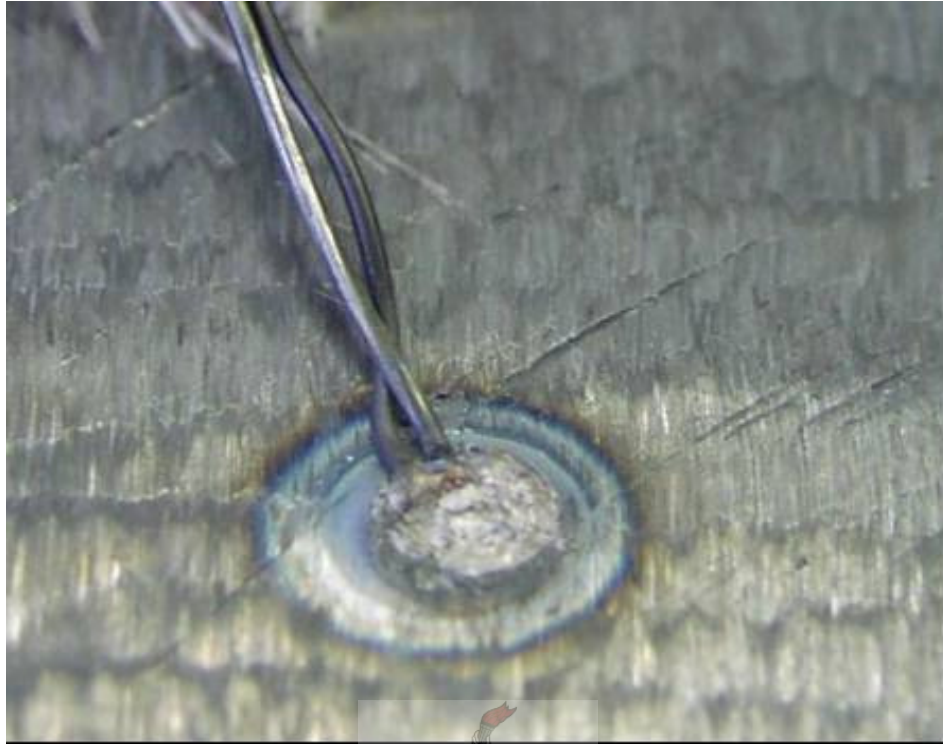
Thermocouple spot-welded to mild steel plate.
